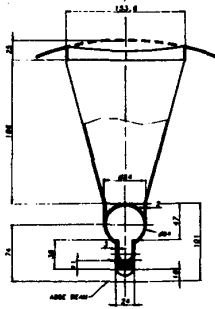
Preliminary drawing of SRFQ2, the cavity to be prototyped.
